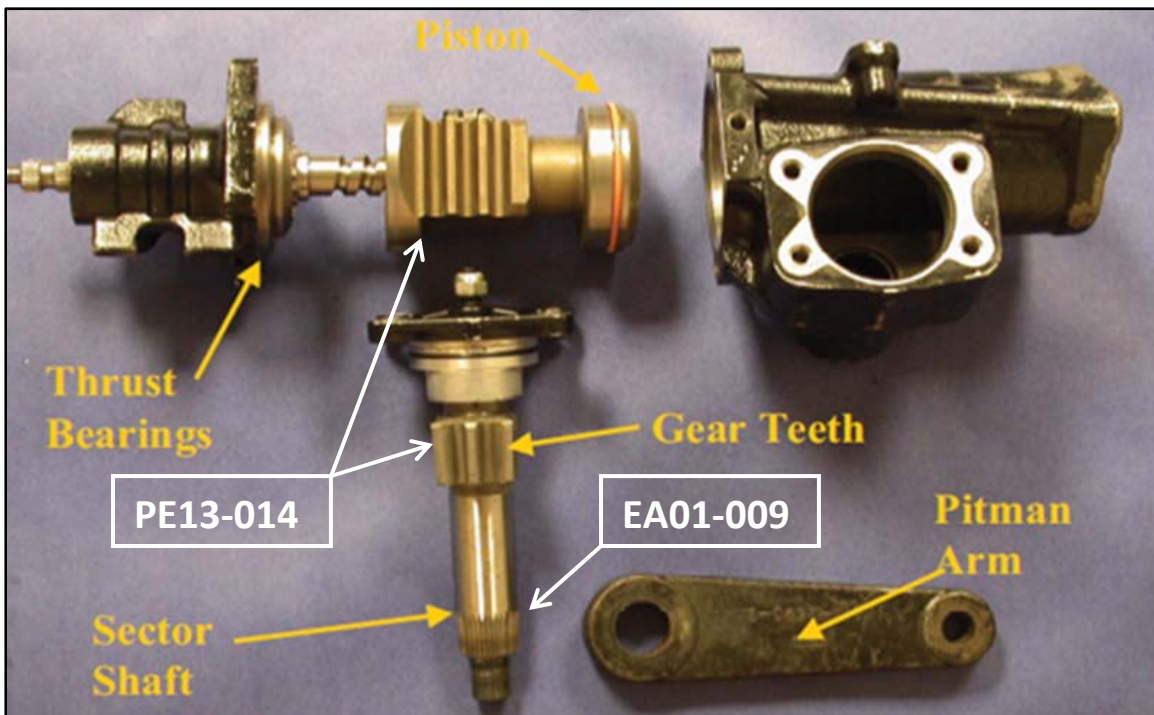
Ford F-Series Super Duty steering gear components and locations of overload failures for EA01-009 and PE13-014.
